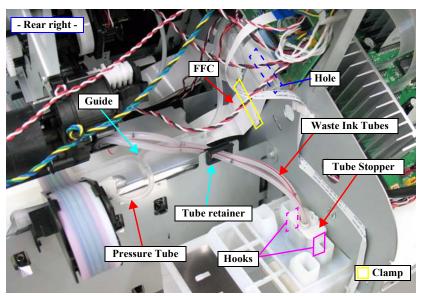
Releasing the FFC, Waste Ink Tube and Pressure Tube
